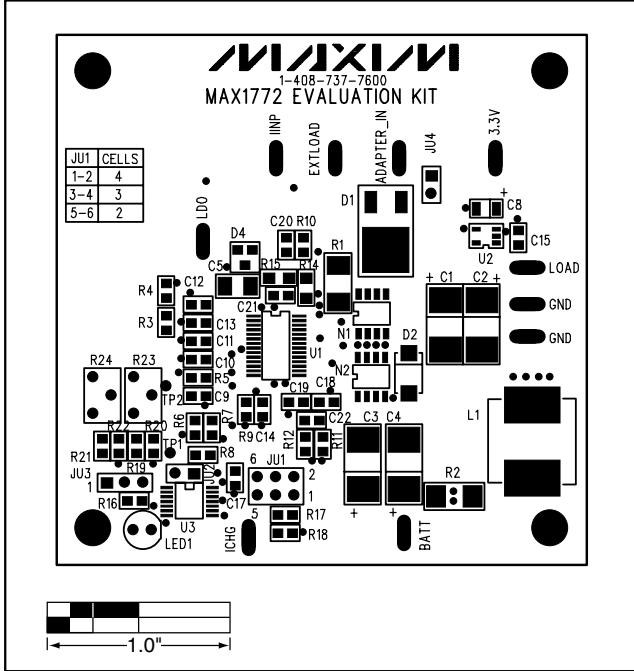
MAX1772 EV Kit Component Placement Guide—Component Side
